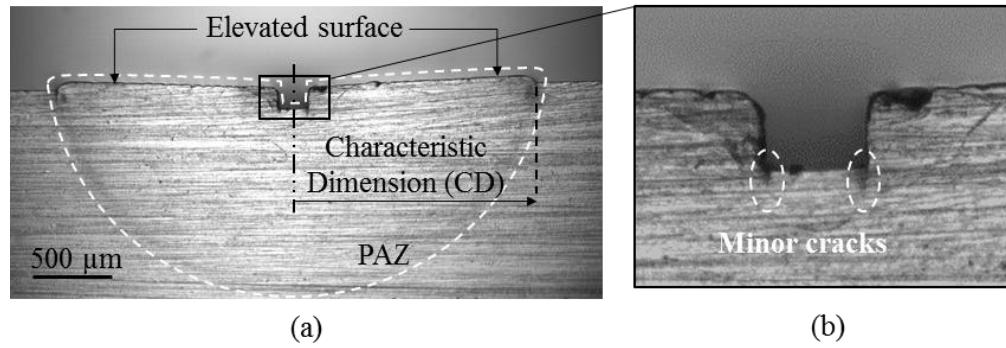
(a) Section view of the embossed channel (b) the minor cracks at the bottom edges of the channel.
